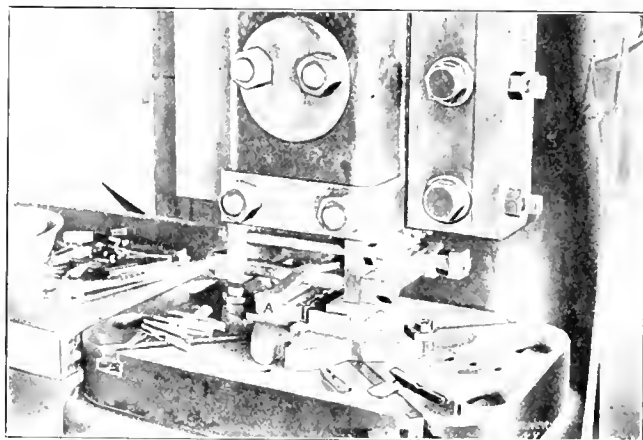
The Flattening and Serrating Punch and Die Ready for Use
